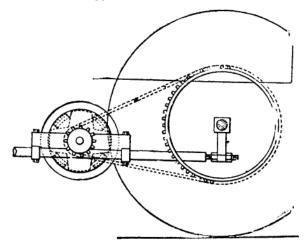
δ-POLE JOEL MOTOR, WITH OUTSIDE ARMATURE, DRIVING BY CHAIN.
